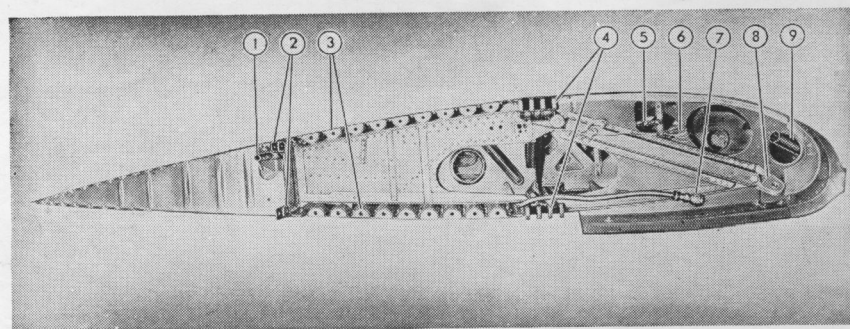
Profile of an outer wing panel, showing: (1) flap drive tube; (2) shear beam attaching arms; (3) bathtub fittings; (4) main beam fittings; (5) Pitot line connections; (6) fish wires tied to outer panel aileron and aileron tab cables; (7) electrical conduit; (8) wing engine mount lug; (9) generator blast tube.
